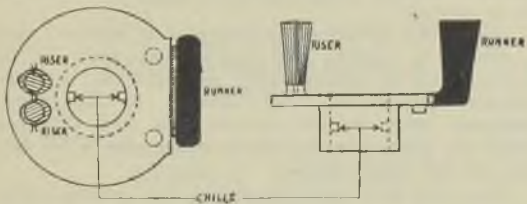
THE BACK OF FIG. 7, SHOWING A TYPICAL SKETCH RECORD.
